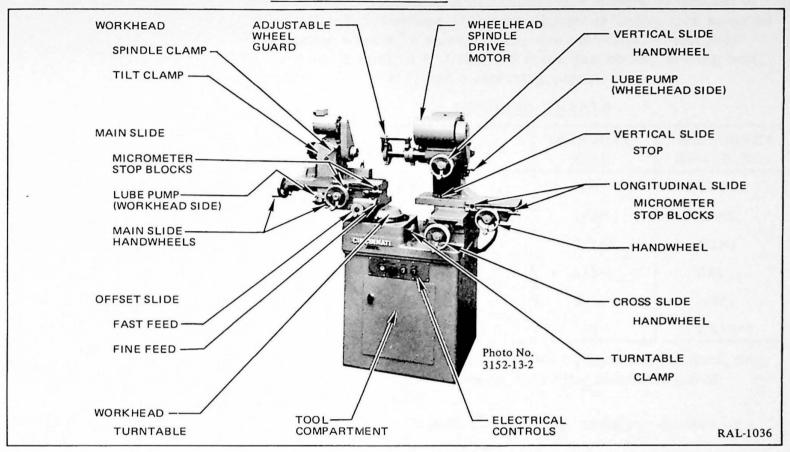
MACHINE NOMENCLATURE - FRONT VIEW
